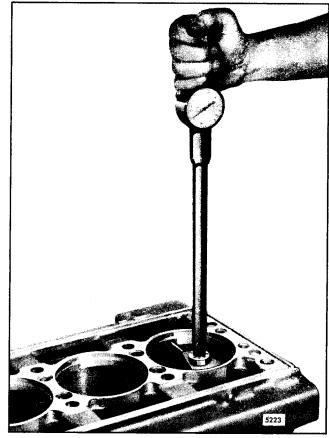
Checking Cylinder Block Bore with Tool J 5347-B
